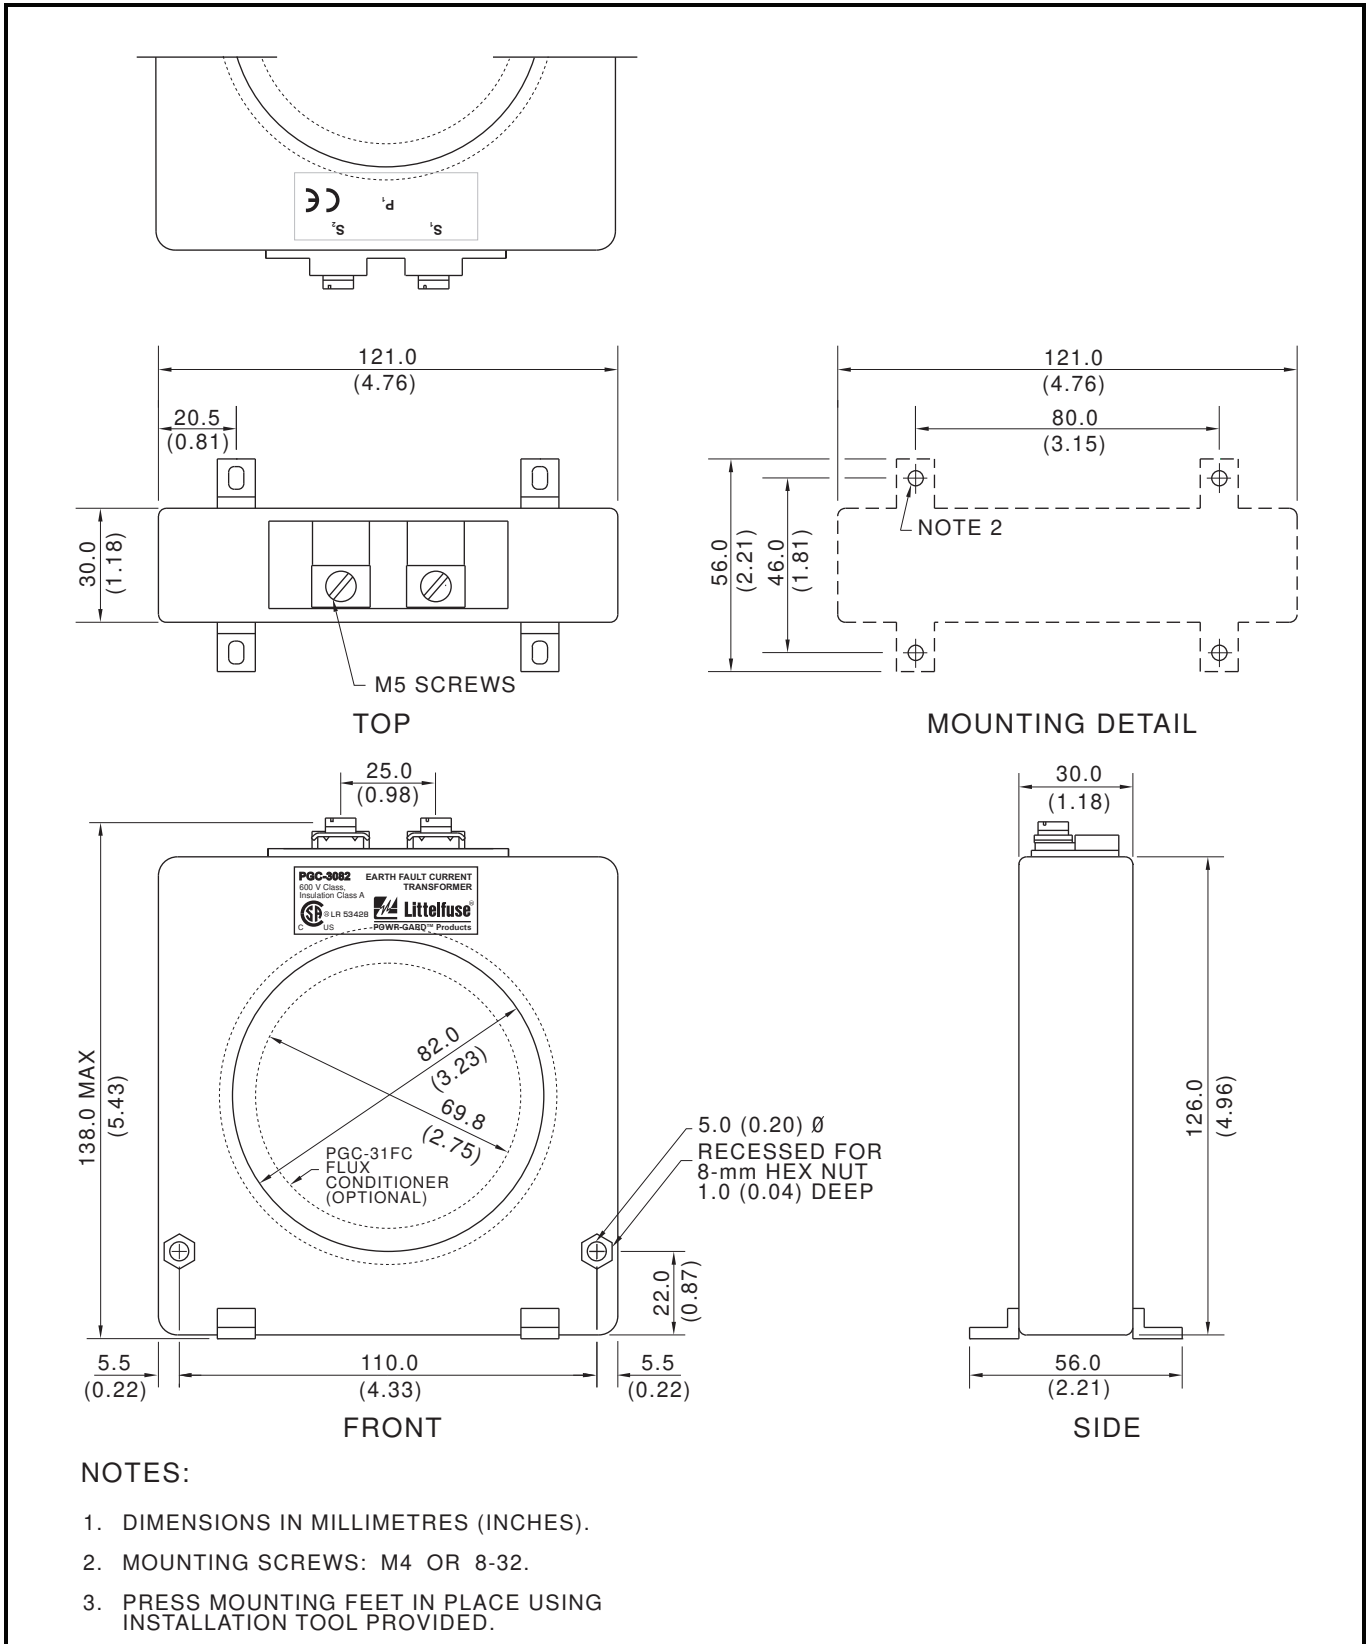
PGC-3082 Outline and Mounting Details.
